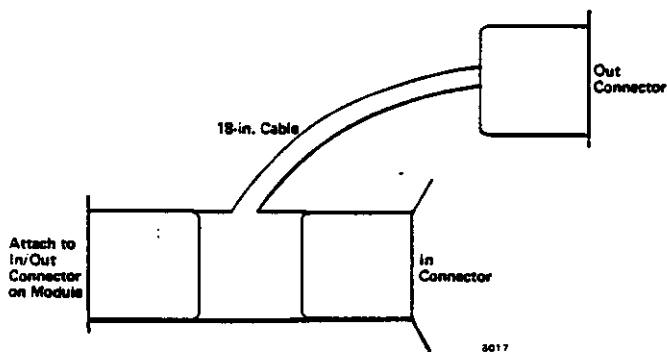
Detail of 772-C1 Printing System Cable.
